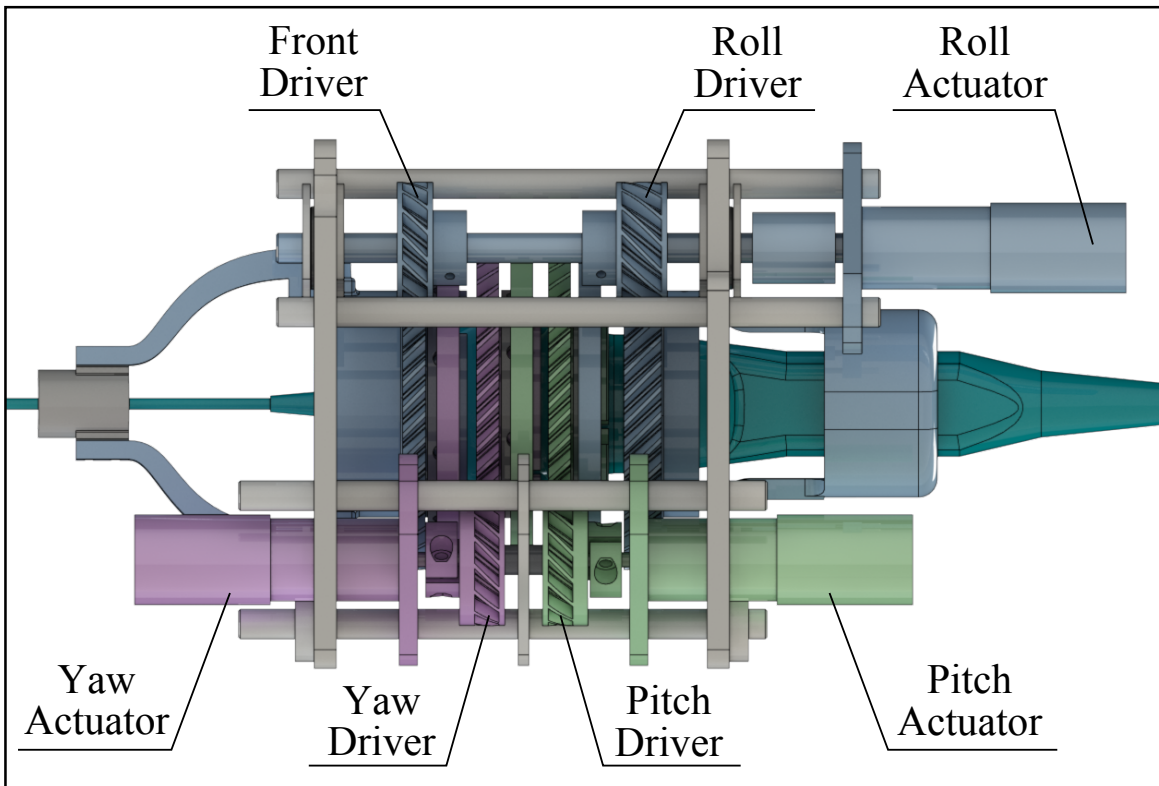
CAD model showing a detailed bottom view of the rotational transmission
